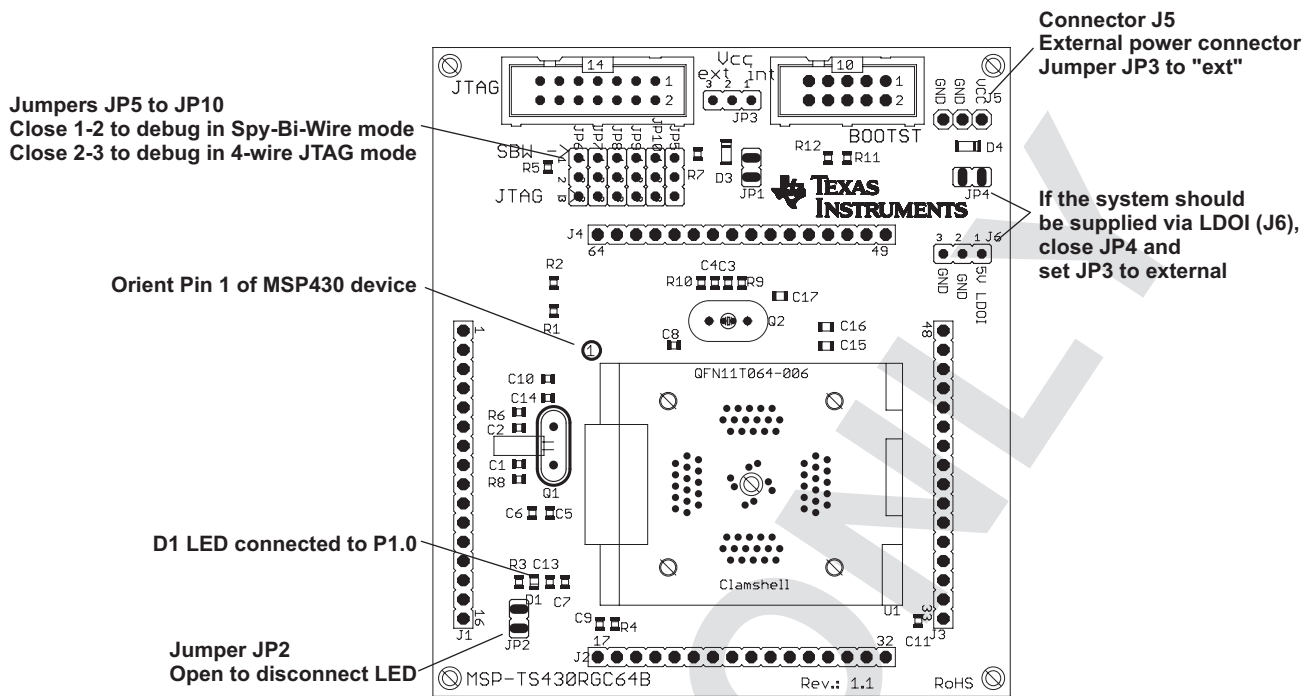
MSP-TS430RGC64B Target Socket Module, PCB
